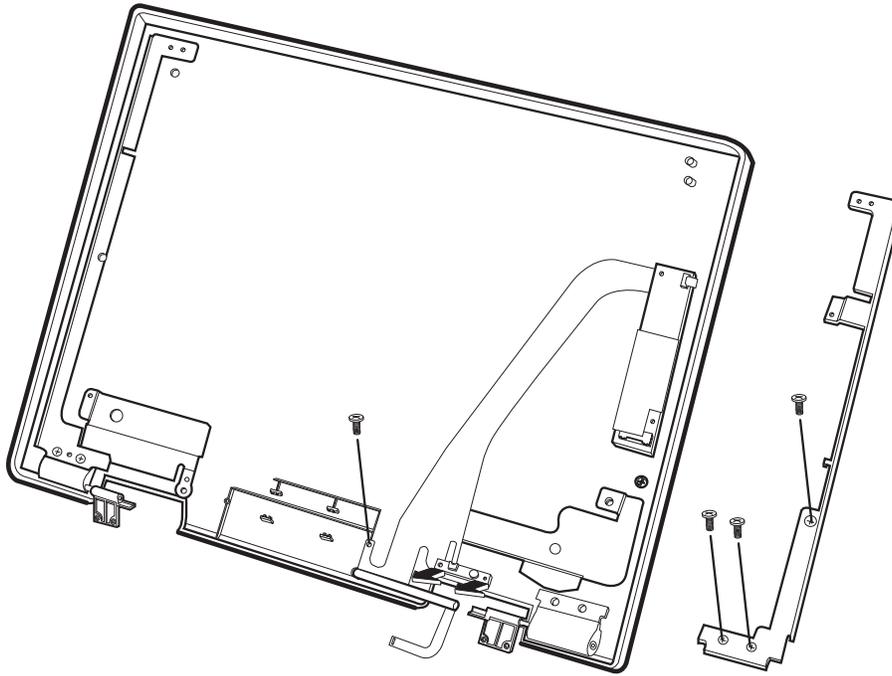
Removing the 12.1 Inch LCD Panel Inverter
